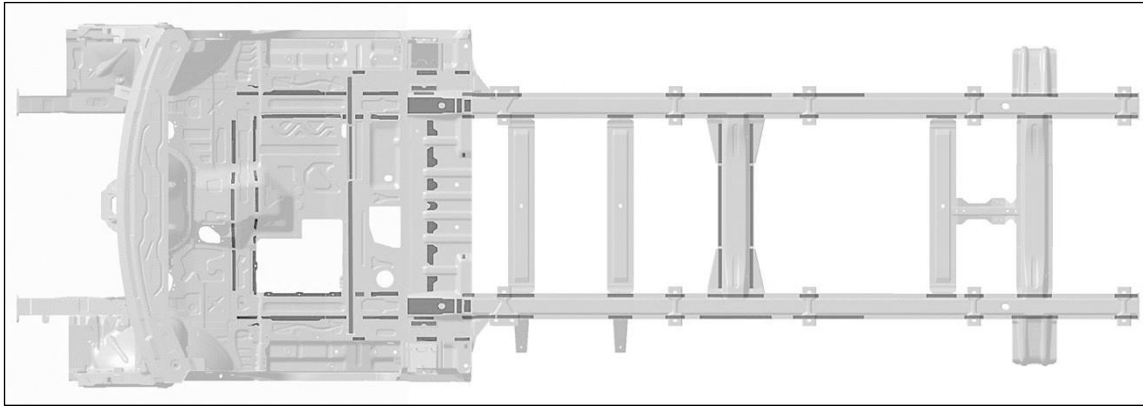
Single cab bonded joints (e.g. short wheelbase 3,640 mm)
